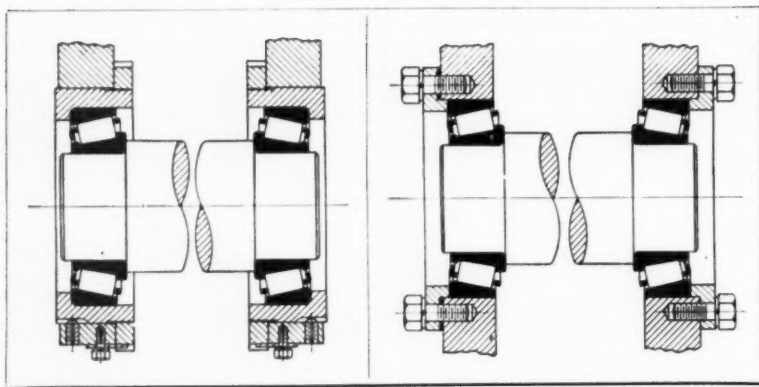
(Left) Mounting Used when Gears or Other Parts Must be Located Accurately
